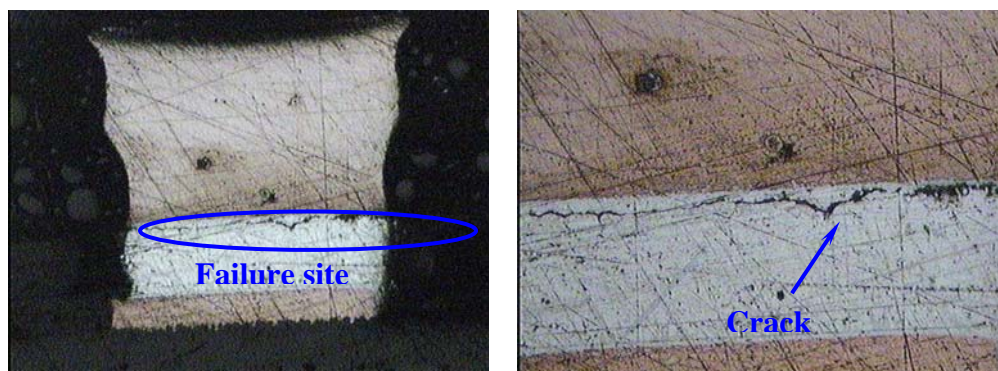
Crack failure in solder joint of VQFN assembly.
